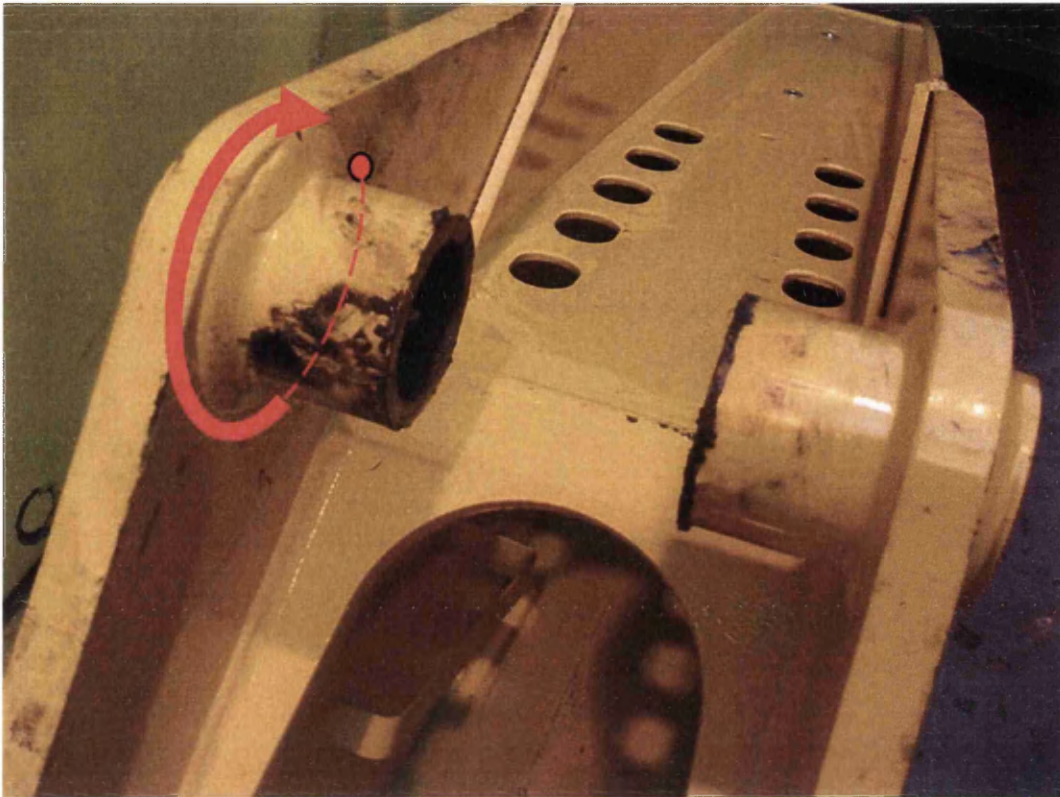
Scarf joint transition weld toe - Structural stress profiles for slew and excavating load
